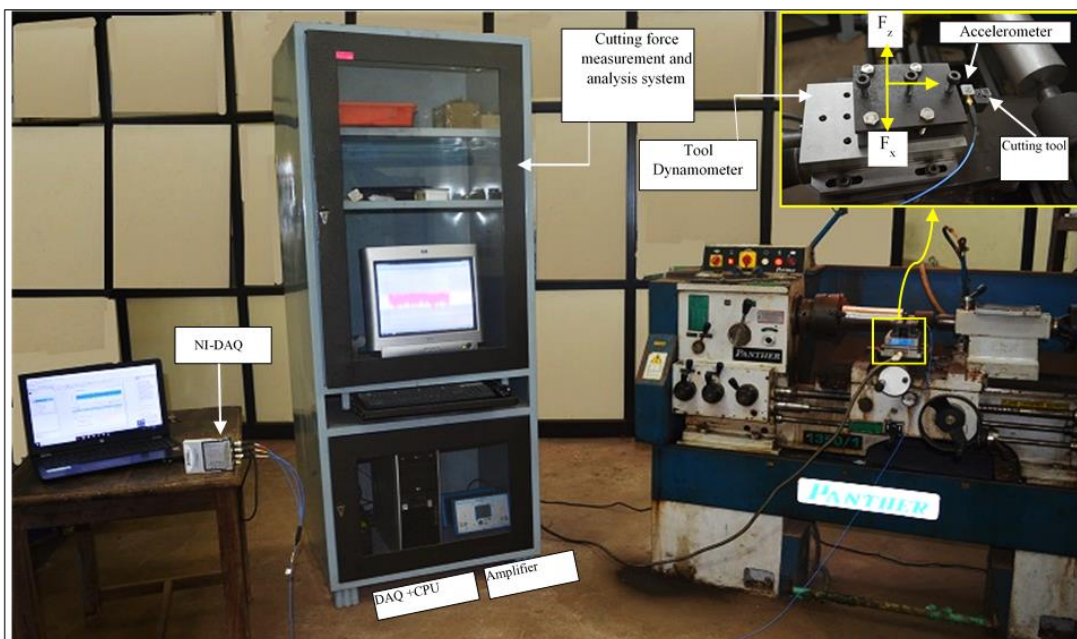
Experimental setup containing lathe machine with force measuring and analysing system
